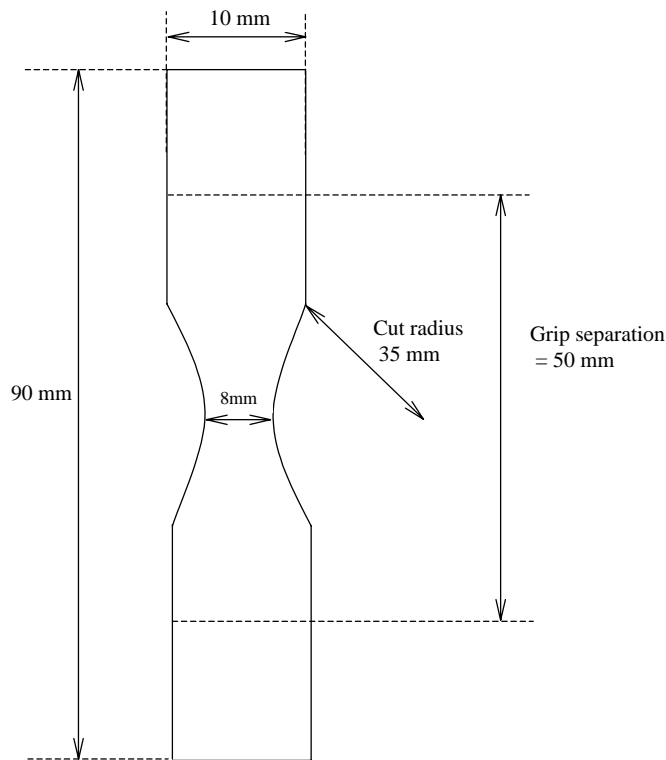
Specimen geometry for the measurement of tensile behaviour at large strains.
